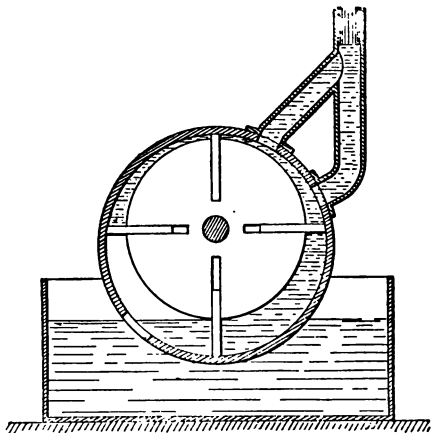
ROTARY PUMP SINGLE REVOLVER.
